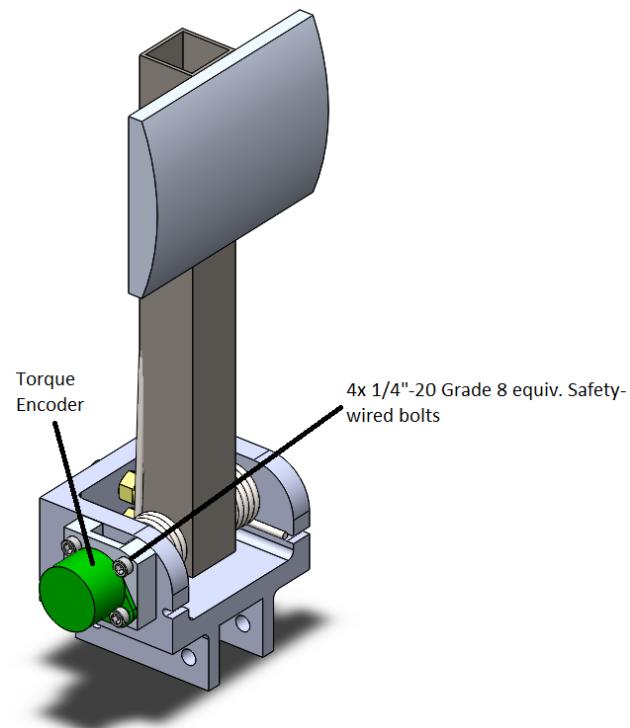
Mechanical fastening and connection to the throttle pedal. Note that the torque encoders are two encoders housed in one package
